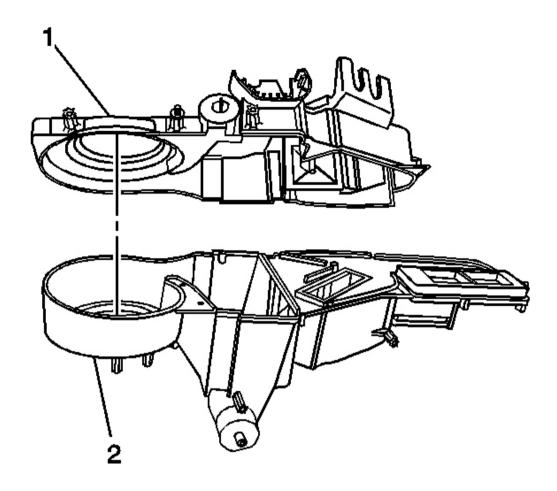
Upper HVAC Module Case And Lower HVAC Module Case Courtesy of GENERAL MOTORS CORP.
